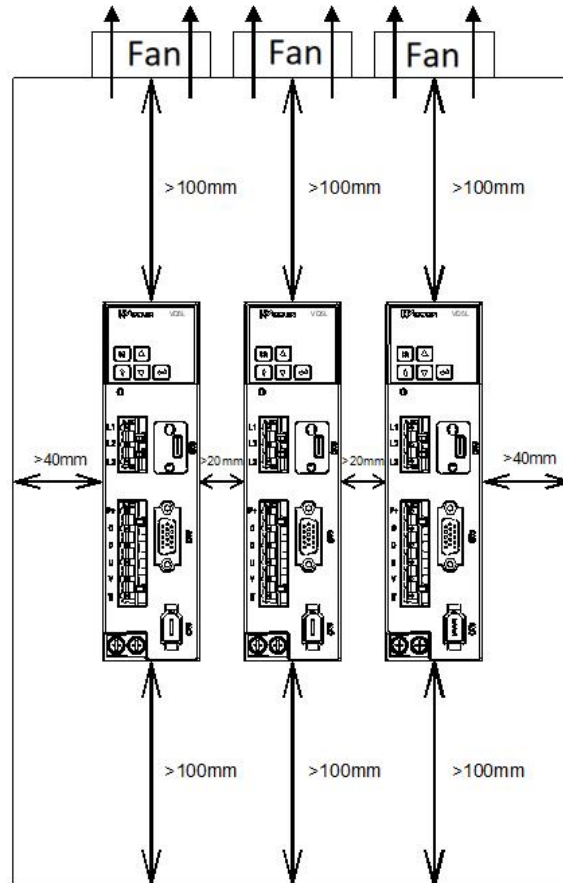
Mounting dimensions for multiple VD5E drives in parallel
